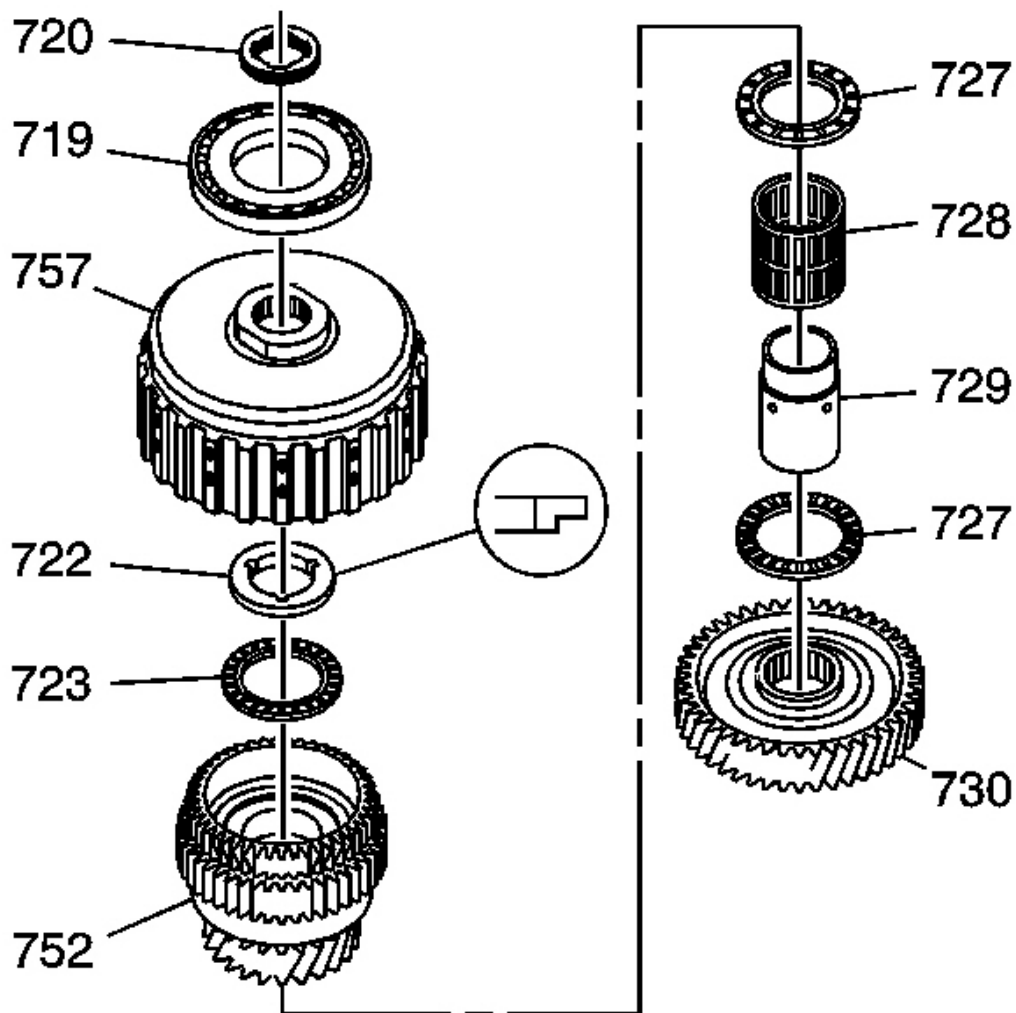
Rear Bearing, Drive Gear & Components Removed
